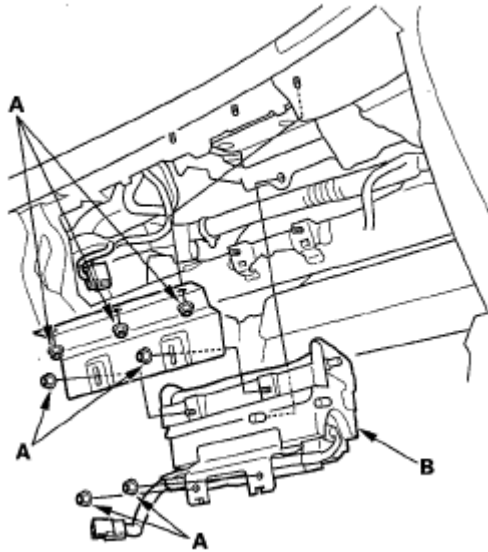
Identifying Mounting Nuts And Front Passenger's Airbag
